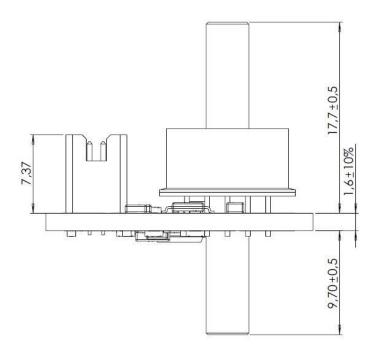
Mechanical dimensions TP1200 differential transducer in side view (mm)
